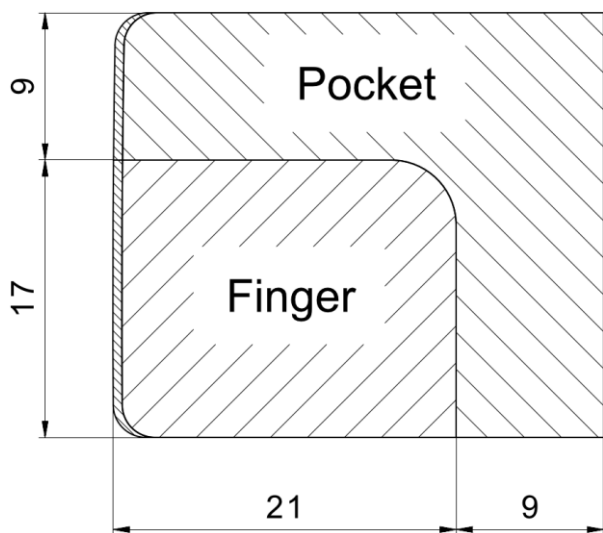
Cross-section of the optimised piston ring design in the ring lock area and its main dimensions
